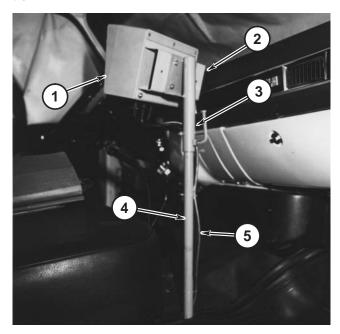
Junction Box Attached in Pre-drilled Mounting Holes on the Front Left Side of the Mixer Feeder Frame
